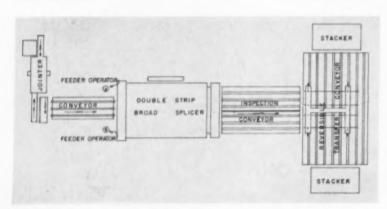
A plan view of a processing unit for splicing veneer-core material which feeds strips edgewise into the German-made Torwegge broad-splicer where joining is accomplished by heat and pressure. Inspection is performed on the off-bearing conveyer to maintain rigid quality control of the core material. The transfer conveyer delivers both strips to one stacker. When the load is full, the transfer conveyer is reversed to deliver the single-ply panels to the other stacker while the first one is being unloaded. Approximate savings are \$0.07 per panel.
